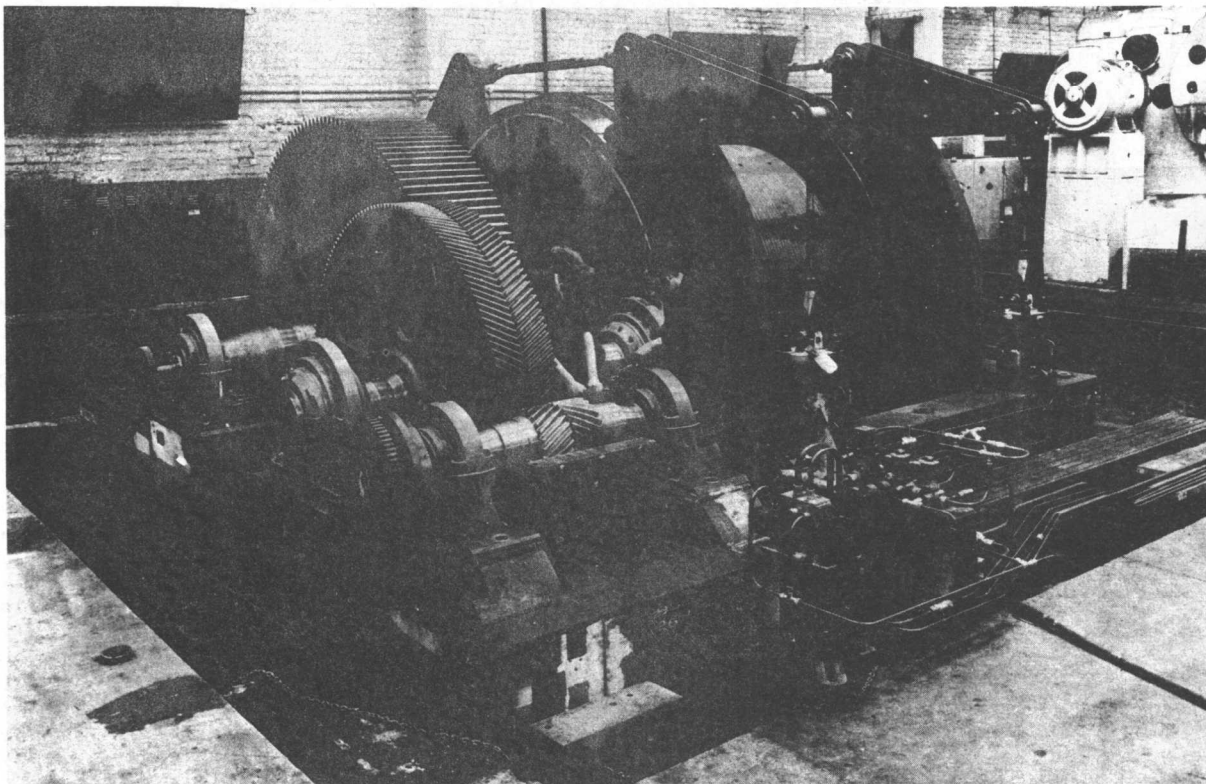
Shop assembly of 1000 hp mine hoist manufactured by Markham and Co. Ltd., for Lingan Mine, Nova Scotia. The 8 ft 6 in diameter x 6 ft wide drum designed for a rope pull of $12\frac{1}{2}$ tons at 700 ft per minute. Cooper split roller bearings incorporated: Drum shaft — 17 in series O2; 15 in series O1; 12 in series O1, second motion shaft — 11 in series O3E, Pinion shaft — 7 in series O2
